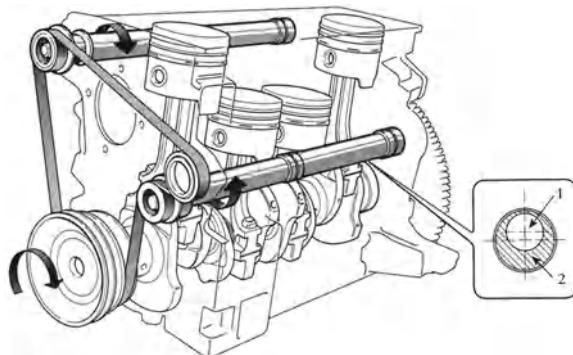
Balancing shafts applied to a four-cylinders in-line engine. 1: Rotation center of the shaft on its bearings; 2: Counterweights applied to the shaft (courtesy of FIAT)
